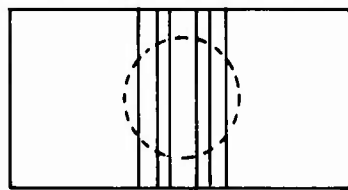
Schematic Illustration of Failure in Dovetail Pull Fixture
